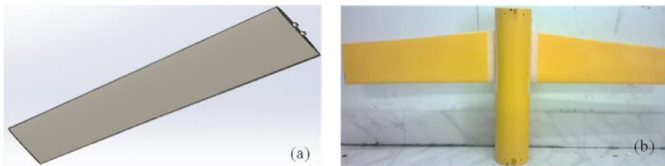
(a) CAD model of wings (b) fabricated wings attached to the mid section.
